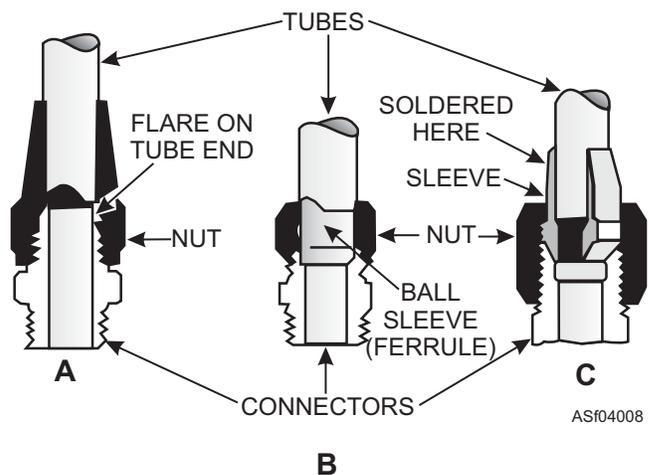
Types of fittings used on fuel lines. (A) Flared. (B) Compression. (C) Soldered.
